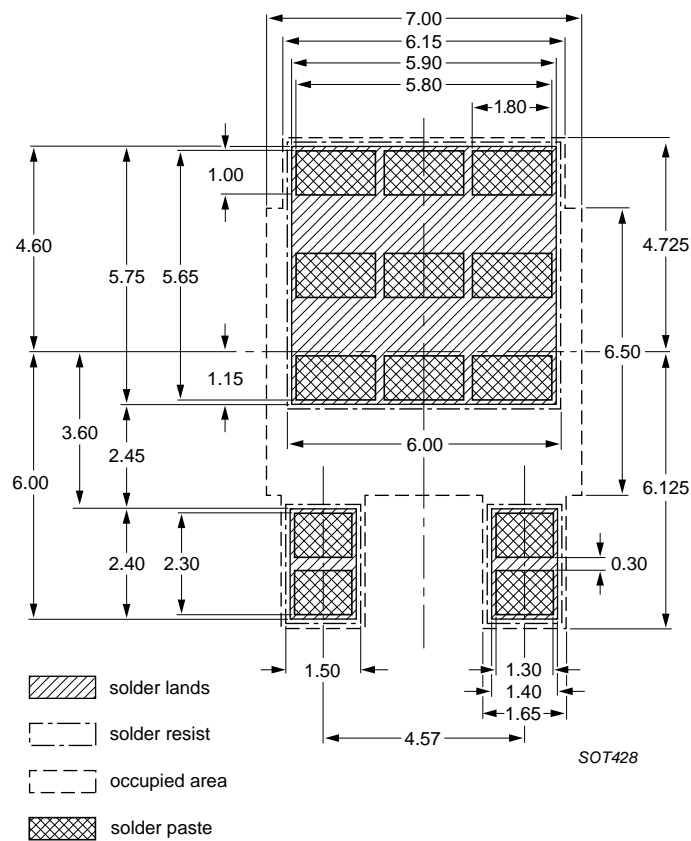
Reflow soldering footprint for SOT428 (DPAK)
